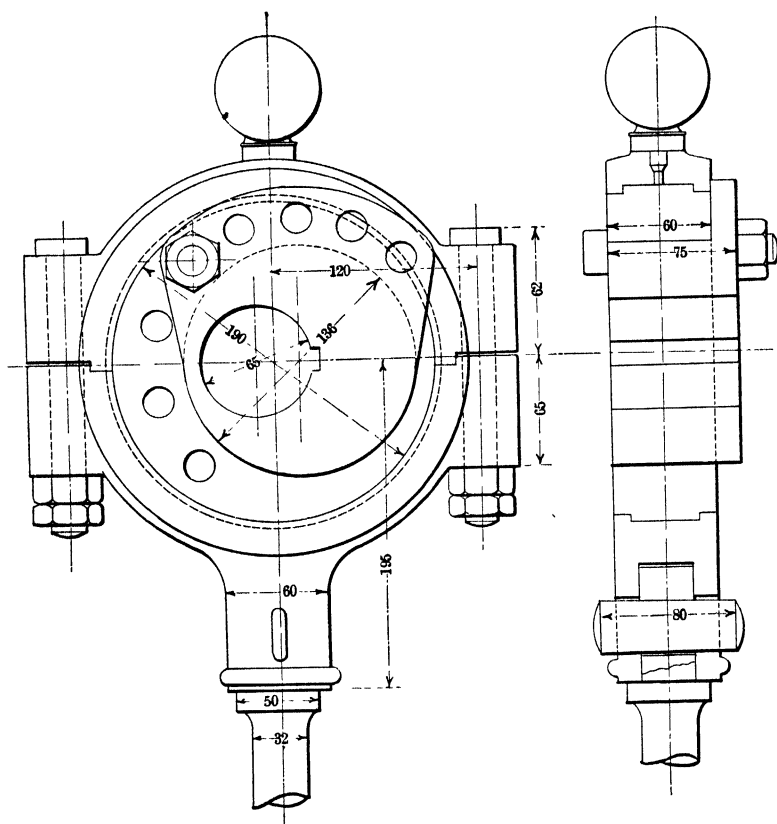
ECCENTRIC OF HYDRAULIC JIG.
